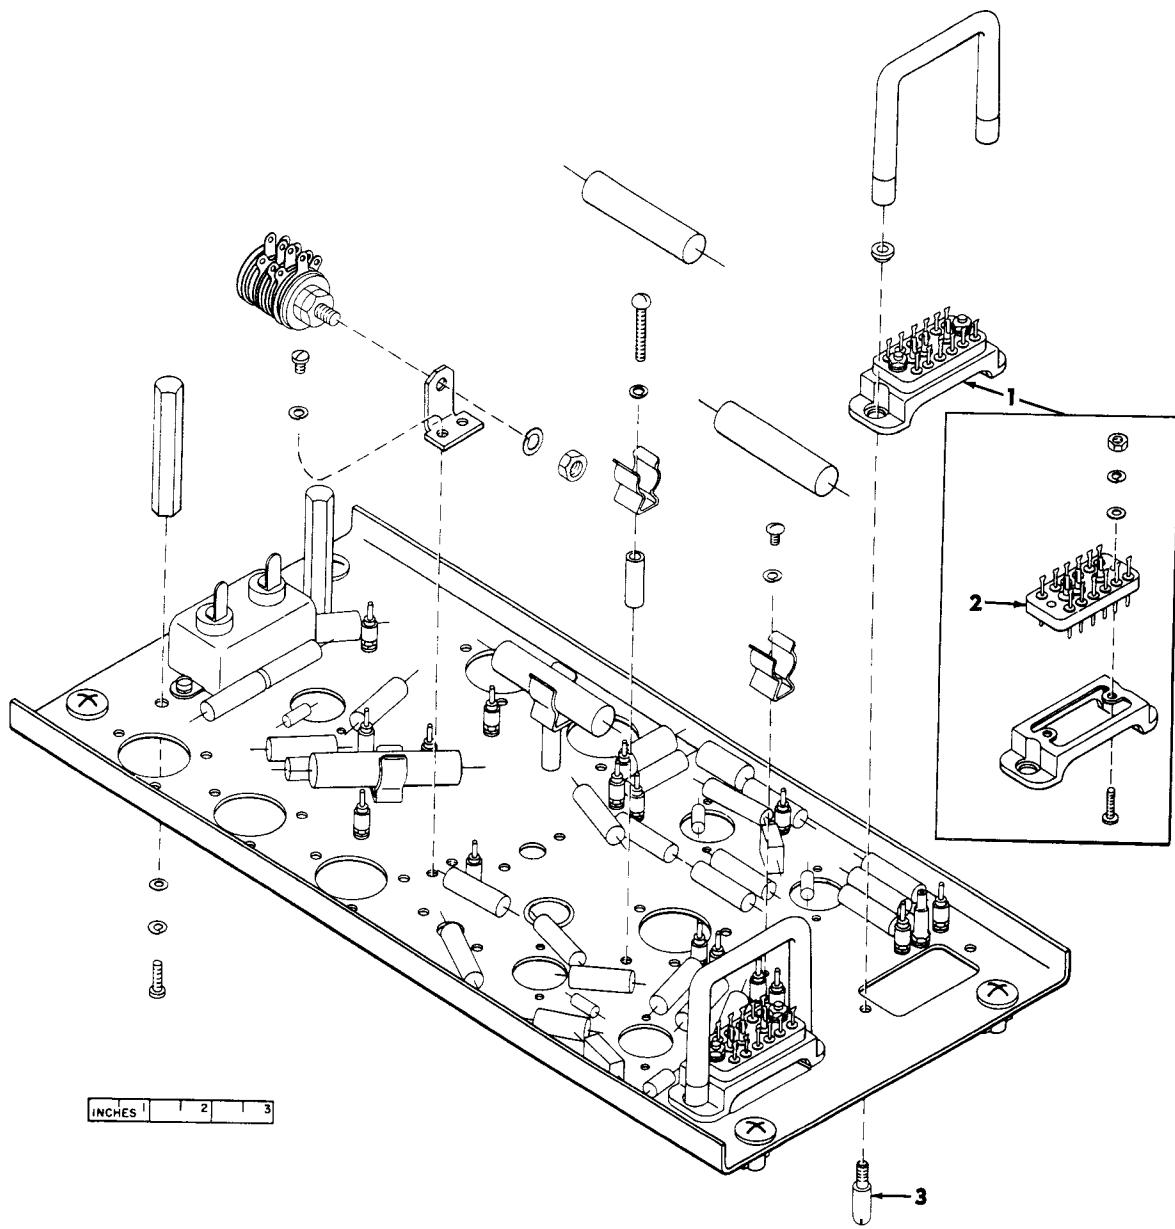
Amplifier, electronic control (9993034) - partial exploded view
